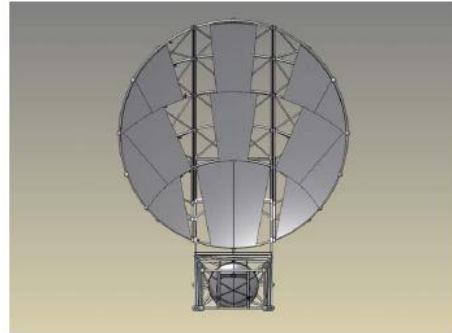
Main reflector panels showing the 6 removable panels prior to disassembly into three sections for transport.
